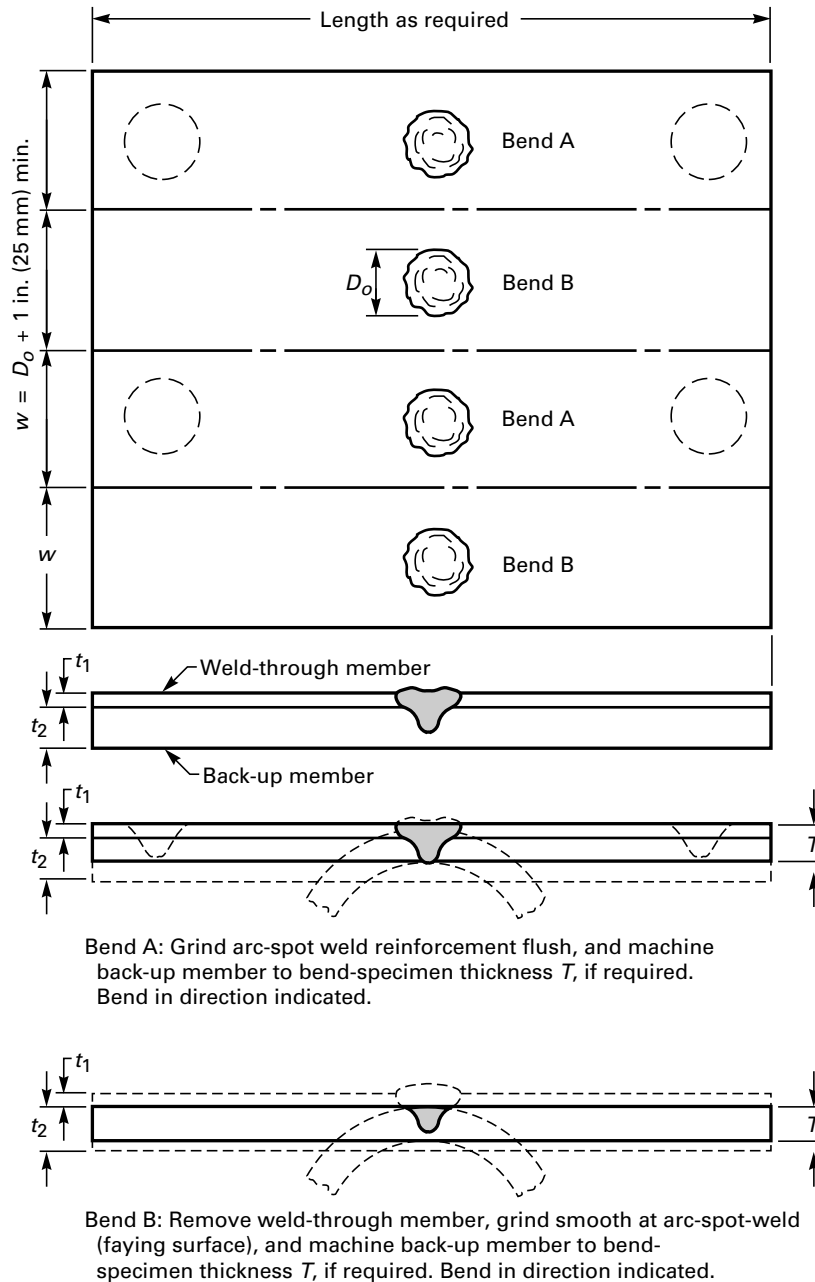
GAS METAL ARC-SPOT-WELD BLOCK FOR BEND TESTS
